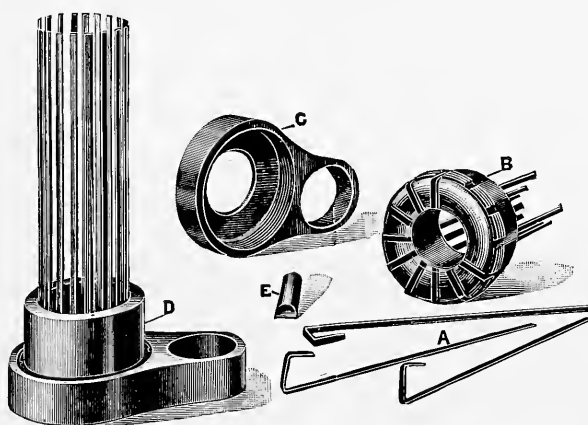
Patent "Solderless" Spring. Complete and Dissected.
